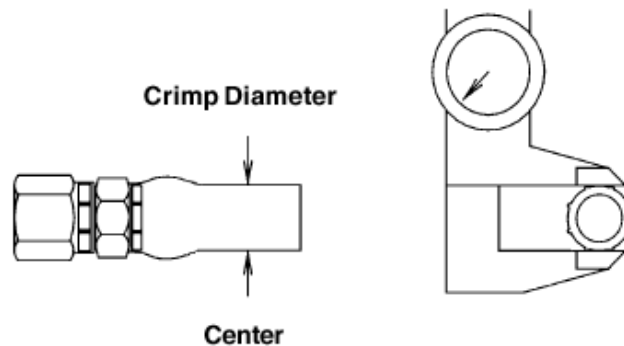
Checking the crimp diameter of a hose fitting after assembly onto the hose.
